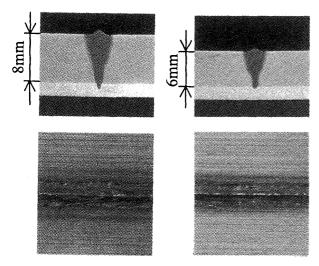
Cross-sections of welds performed using LPLAC welding at different currents and at a constant arc voltage of 26V.
